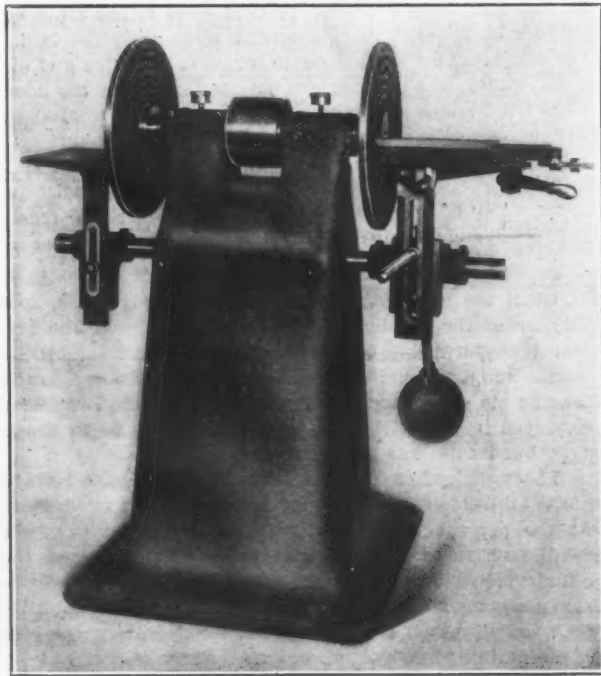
The No. 8 Spiral Disk Grinder Built by C. H. Besly & Co., Chicago.
